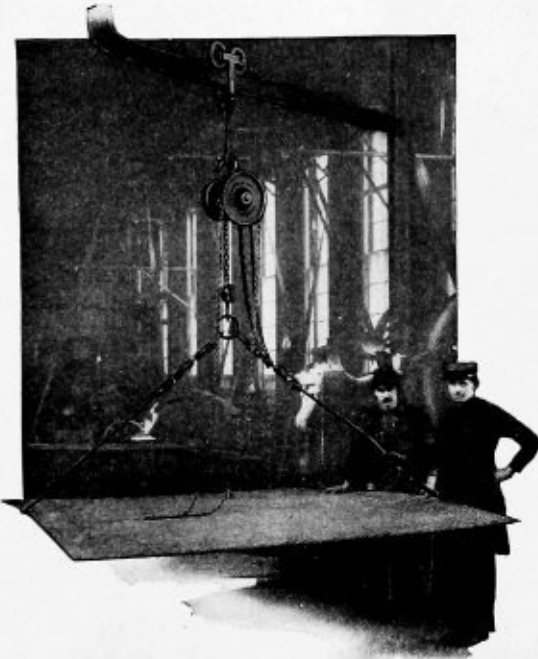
CRANE AND HOIST FOR HANDLING PLATES
